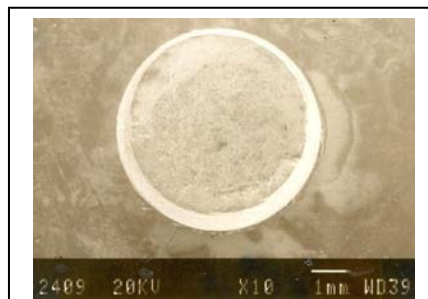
(a). Cup and cone fracture in tensile tested specimen.
